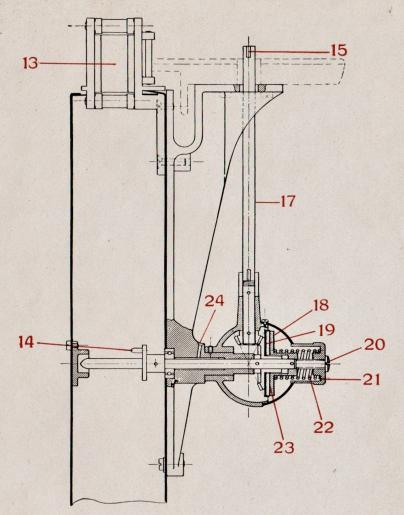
PLATE II Section through the lower (take-up) fire proof spool box Looking towards the machine
